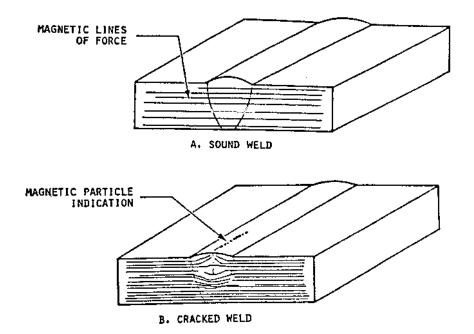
Disruption of magnetic field by weld-metal defect (reprinted from
